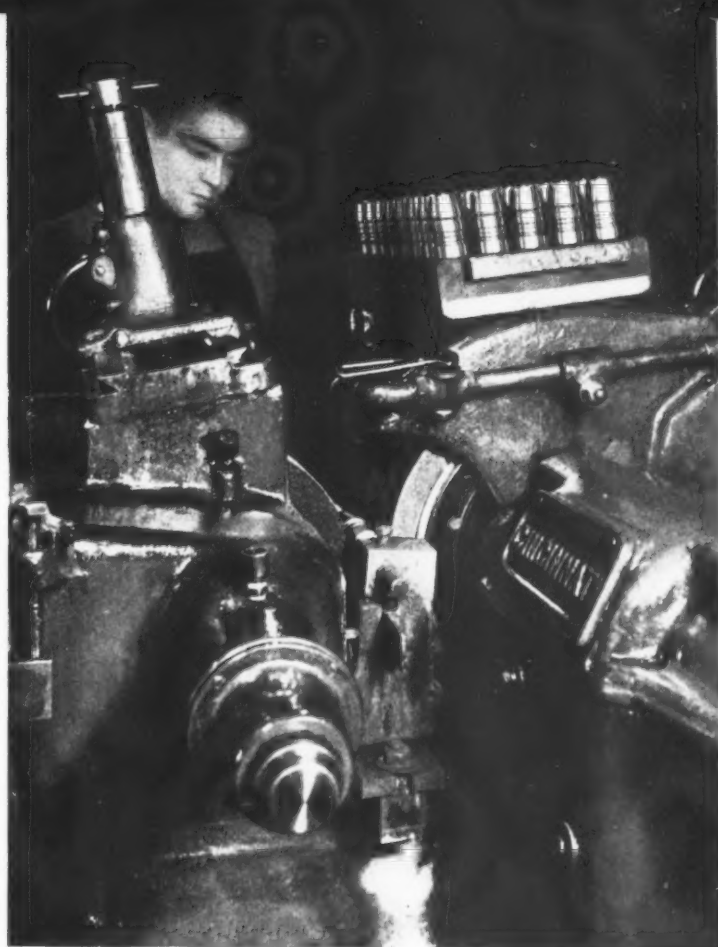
Grinding the Straight and Tapered External Surfaces of 40-millimeter Shells to within Plus or Minus 0.003 Inch on a Centerless Grinder
